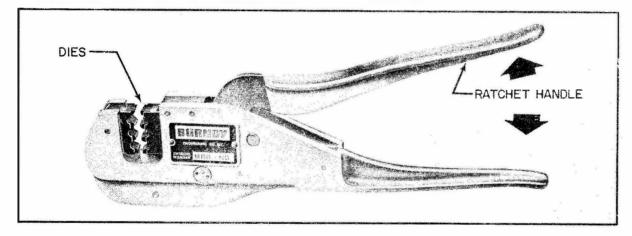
Crimping Tools MR8-PV, -EC and -NC.
